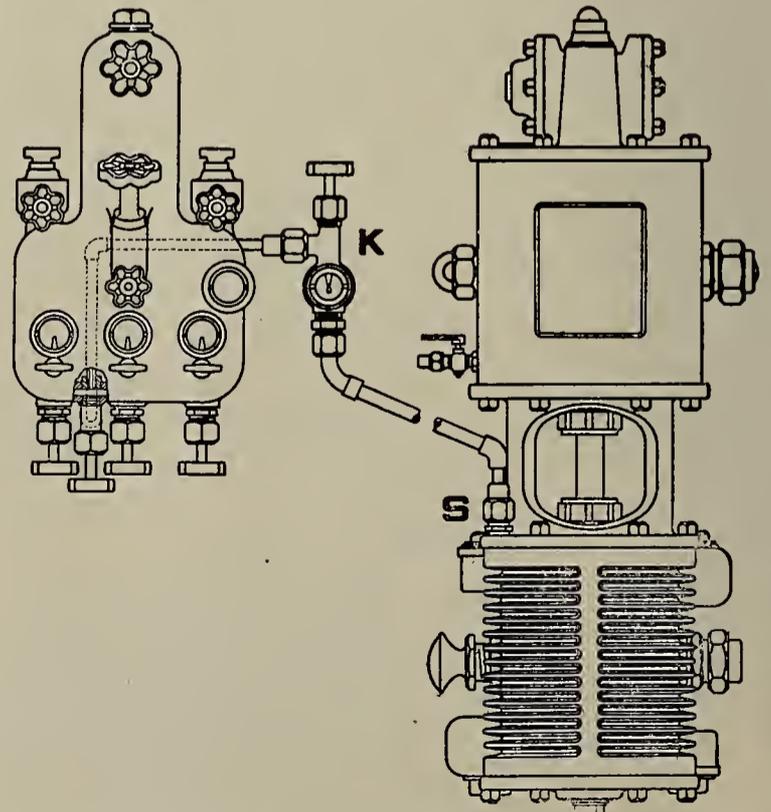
SIGHT FEED AIR CYLINDER LUBRICATOR CONNECTED TO WESTINGHOUSE AIR PUMP-K, SINGLE SIGHT FEED FILLING-S, CHECK VALVE CONNECTION.
